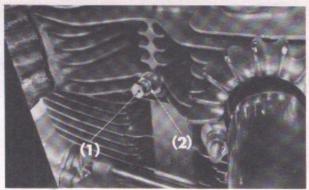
(1) Tensioner setting bolt (2) Lock nut
